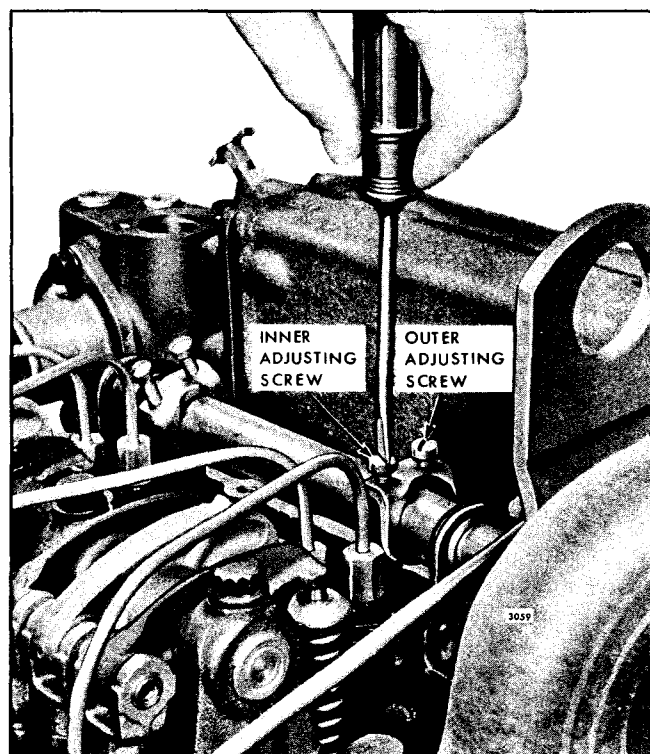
Adjusting Height of Rack Control Lever Adjusting Screws
